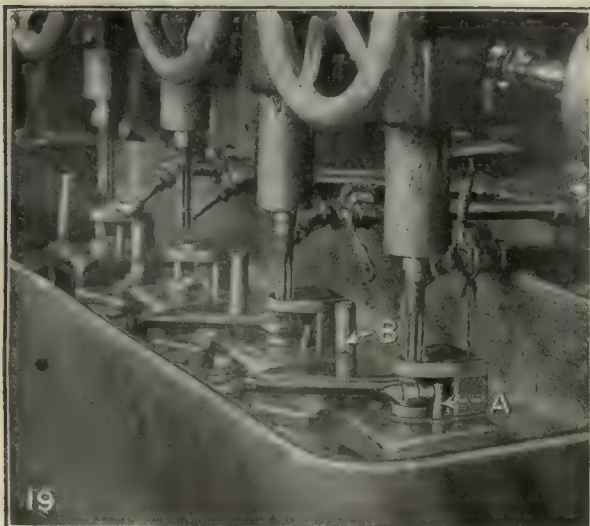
FINISH-REAMING PISTON-PIN HOLE
